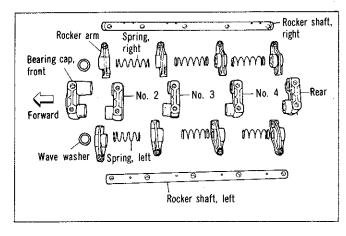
Rocker arm shaft assemblies (chain drive camshaft type)
